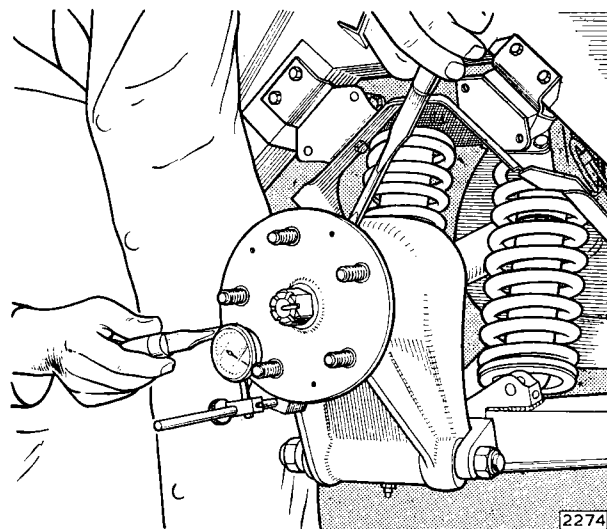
Checking the hub bearing end float when in position (Churchill Tool No. J.13)
